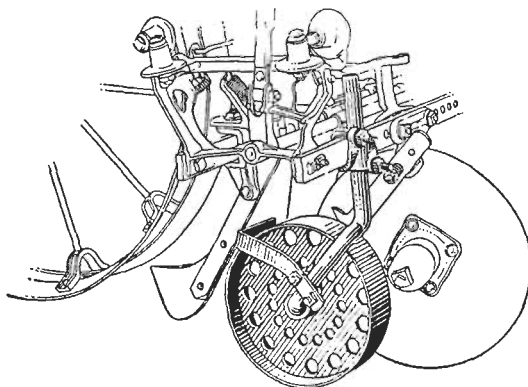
Gage-wheel attachment for single-disk furrow openers.
